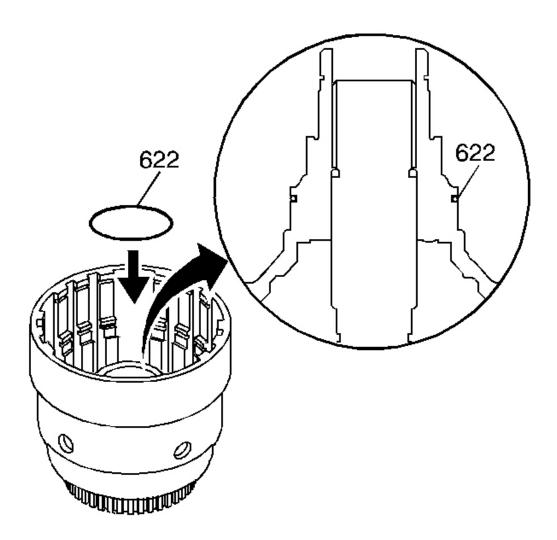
Locating Forward Clutch Housing O-Ring Seal
